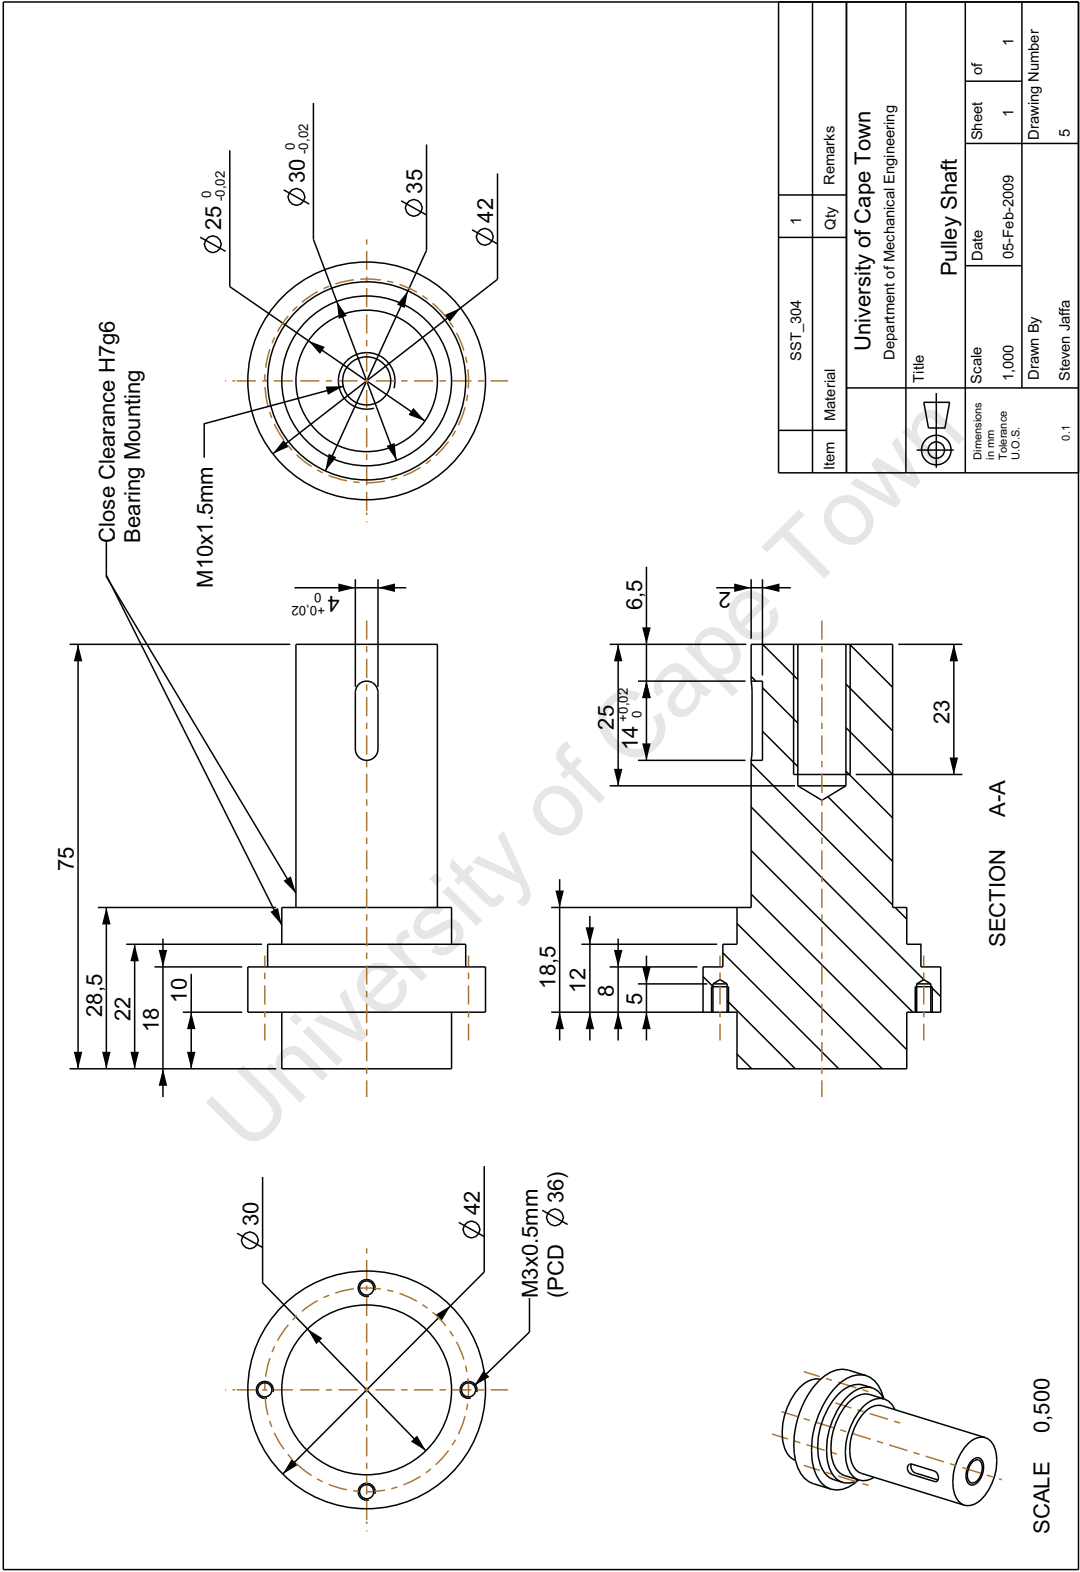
Manufacturing Drawing: Pulley Shaft.
